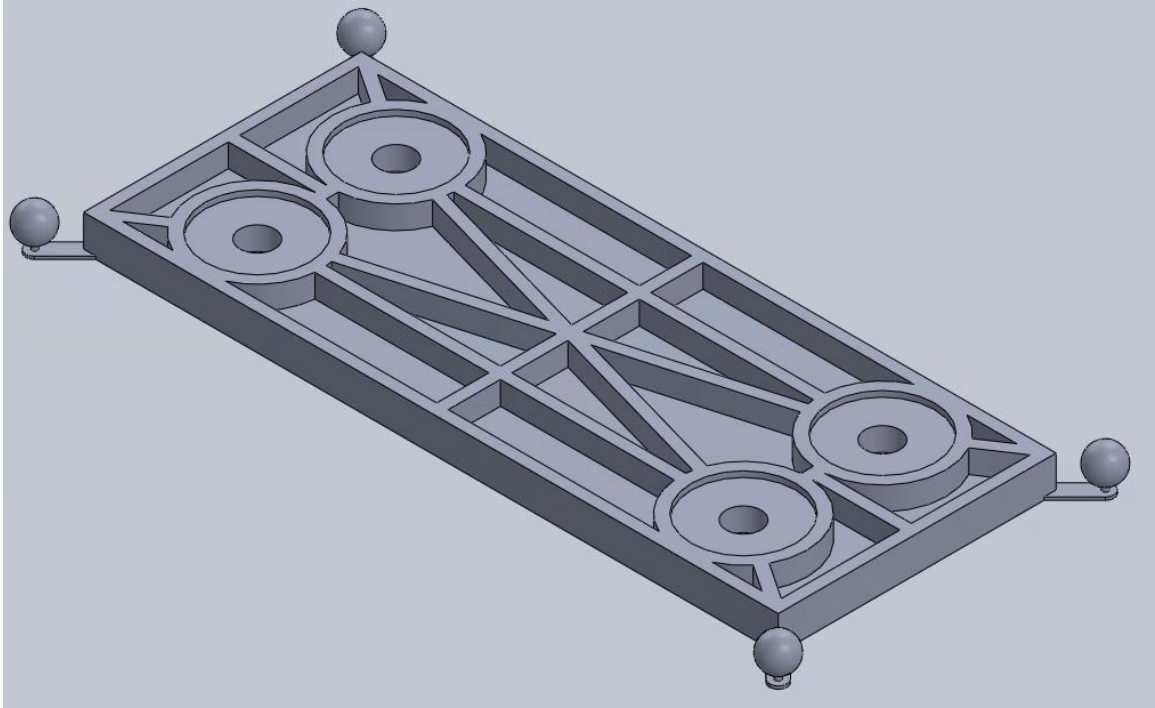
Lower platform complete with cutouts for wheel brackets and positional sensors mounted to corners.
